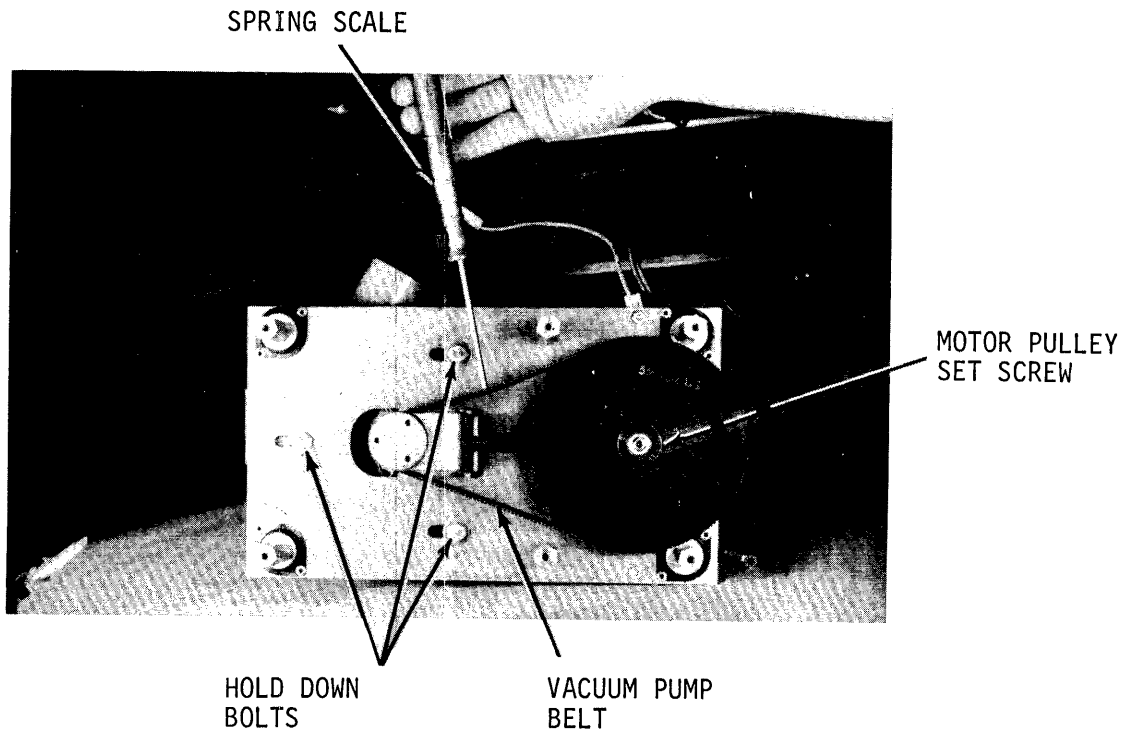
Vacuum/Blower Motor Belt Tension Adjustment
